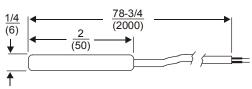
A99BB-200C Sensor Dimensions, in. (mm)
